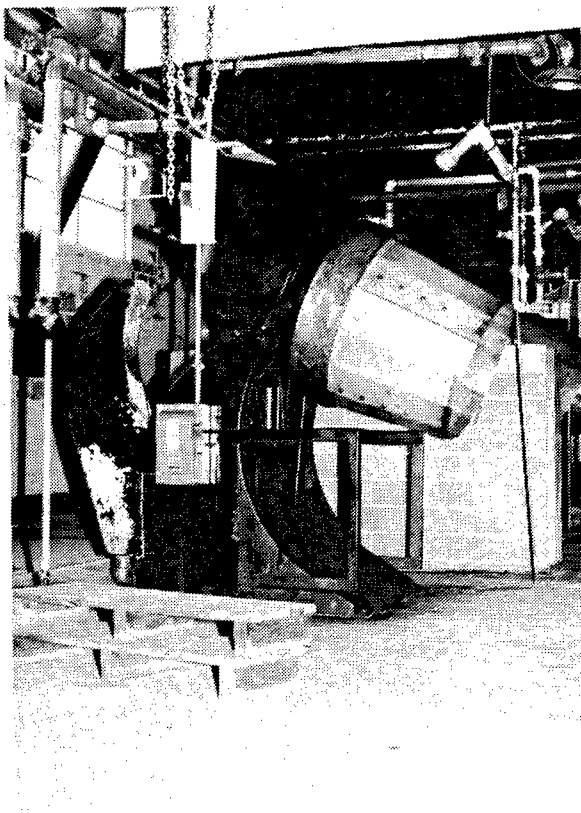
Building 135: Tumbling Barrel manufactured by the Baird Machine Company and received by the plant in 1954.
